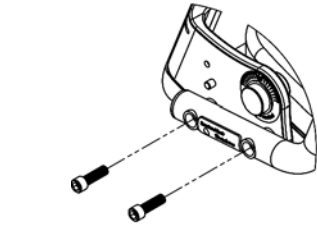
Install the table arm rest to the unit with the two bolts attached. Tighten bolts securely.
